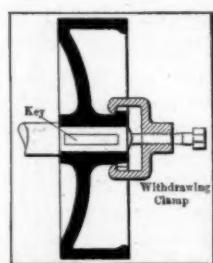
Section of a differential brake drum, showing a withdrawing clamp and the method of its use.
